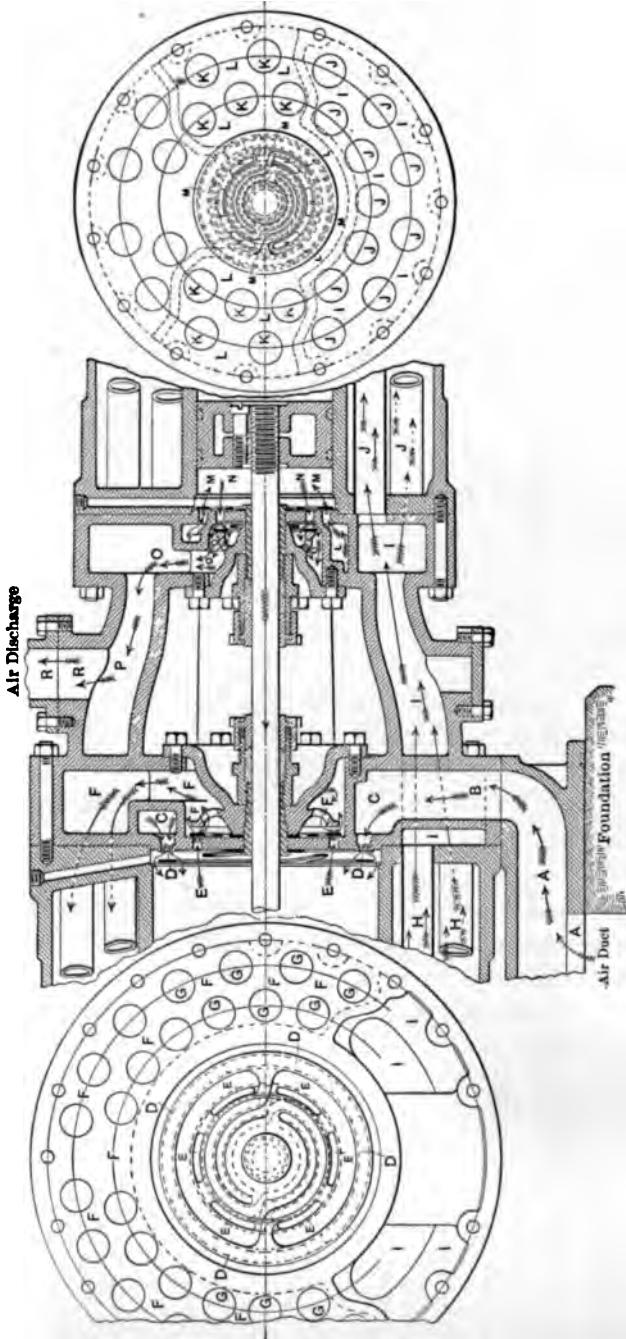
Leyner Compressor. Part Section Showing Flat Annular Inlet and Delivery Valves.
